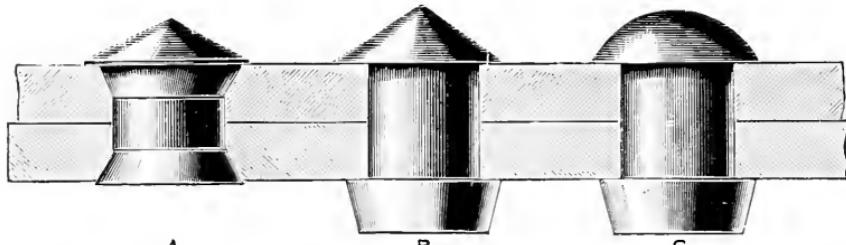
RIVETS WITH HAND-MADE HEADS.
